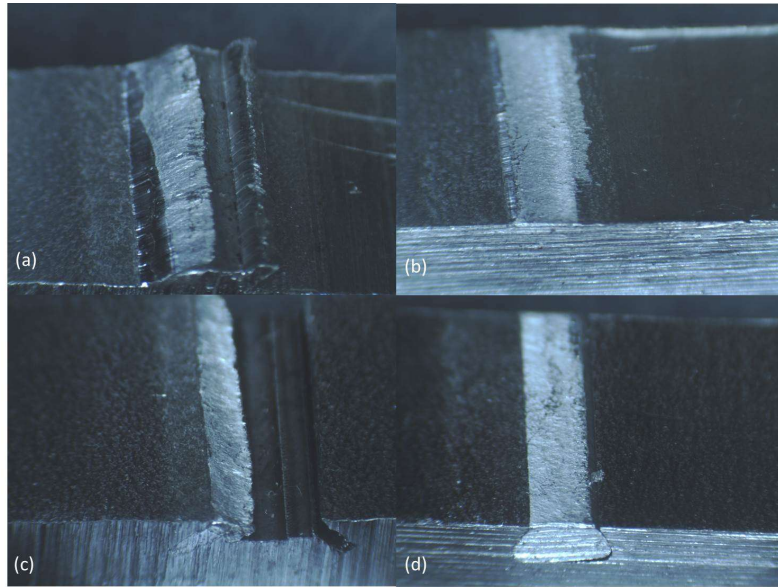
(a),(c) Fracture pattern of slit saw groove (b), (d) Fracture pattern of O-ring dovetail groove
